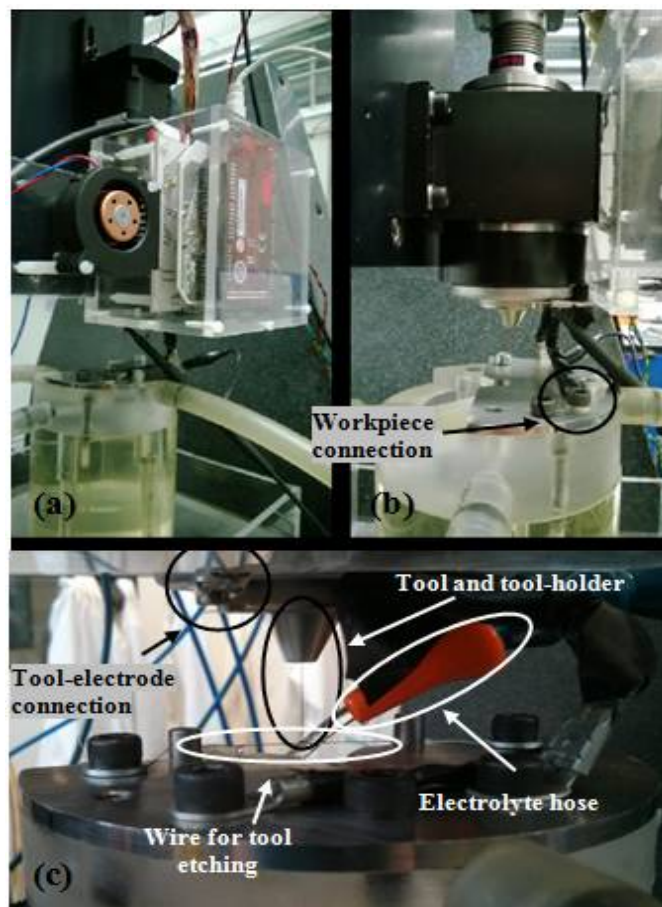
Pictures of the PSU mounted on the μ ECM machine.
